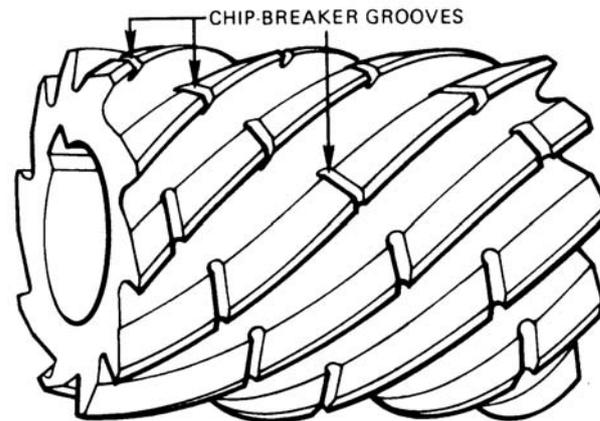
Chip breaking grooves on a plain helical milling cutter.
